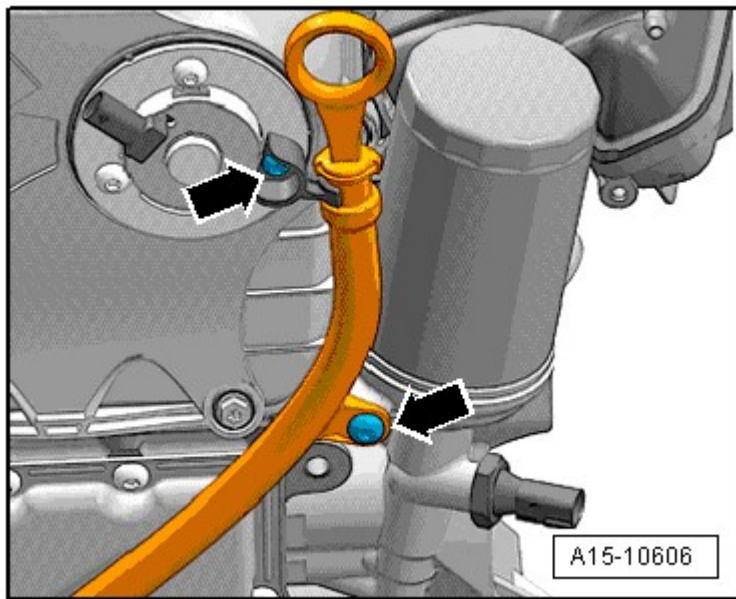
Identifying Oil Dipstick Guide Tube And Bolts
